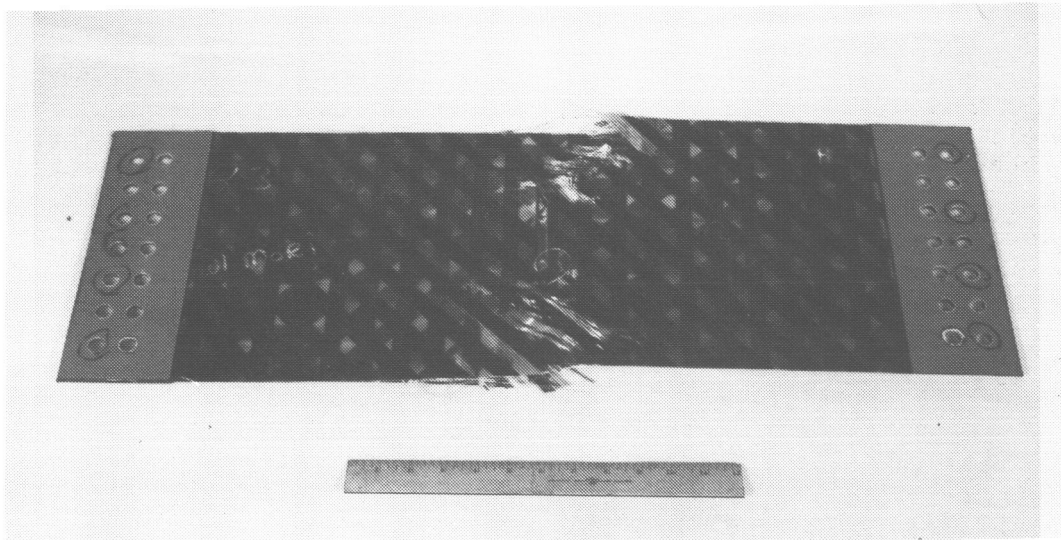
Failed Intraply Hybrid Tension Fracture Specimen
